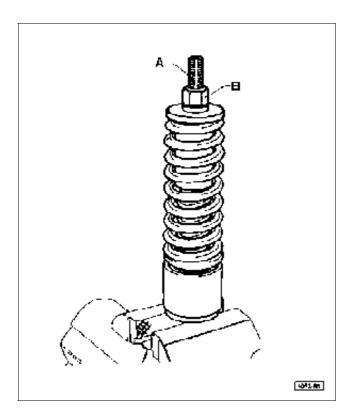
Sensing arm spring. A Tie rod B Nut
